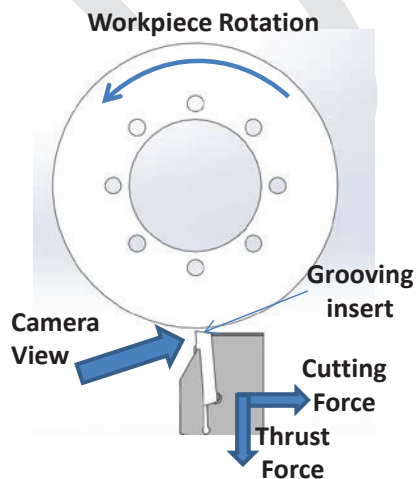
Schematic of workpiece rotation, tool and camera position. AM build direction is into the screen.
